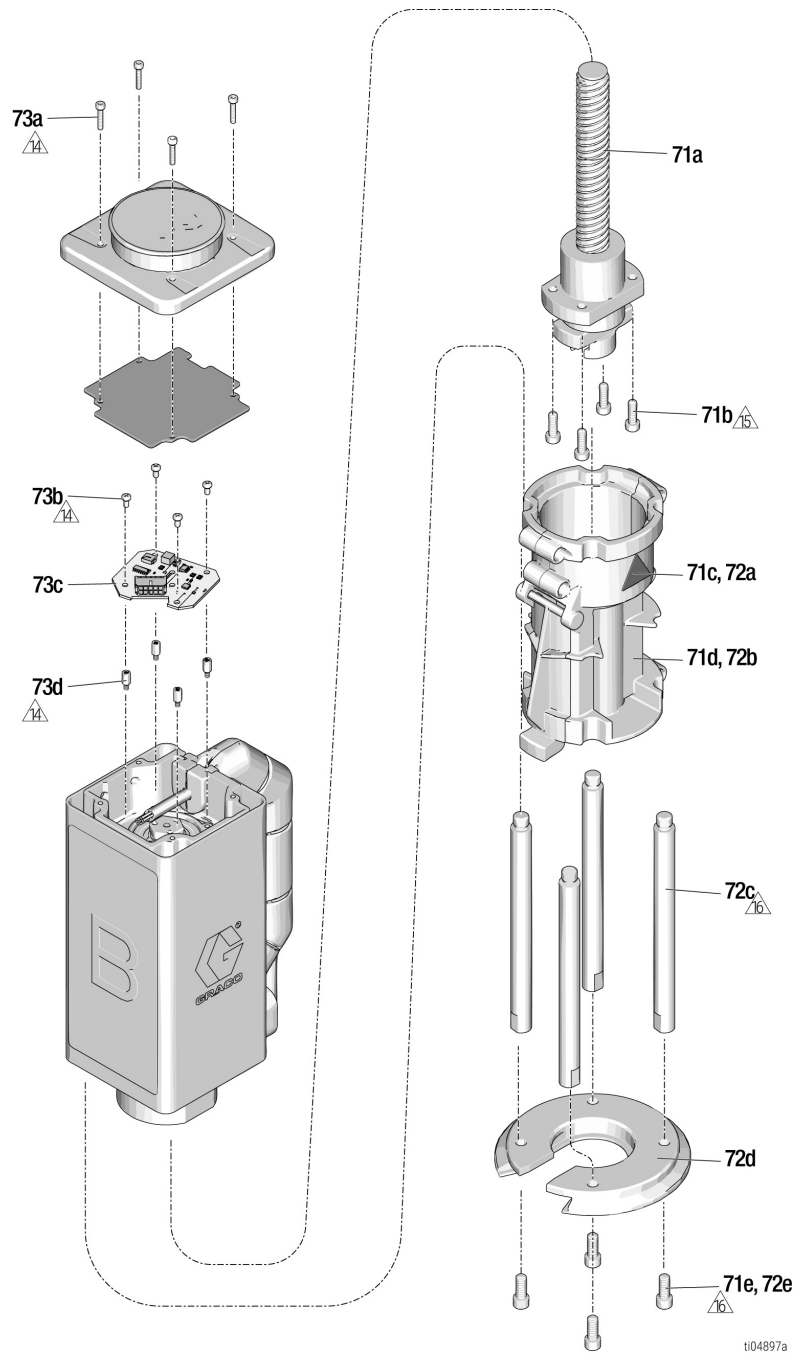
TruMix™ 150 XT Driver Assembly Parts Diagram
